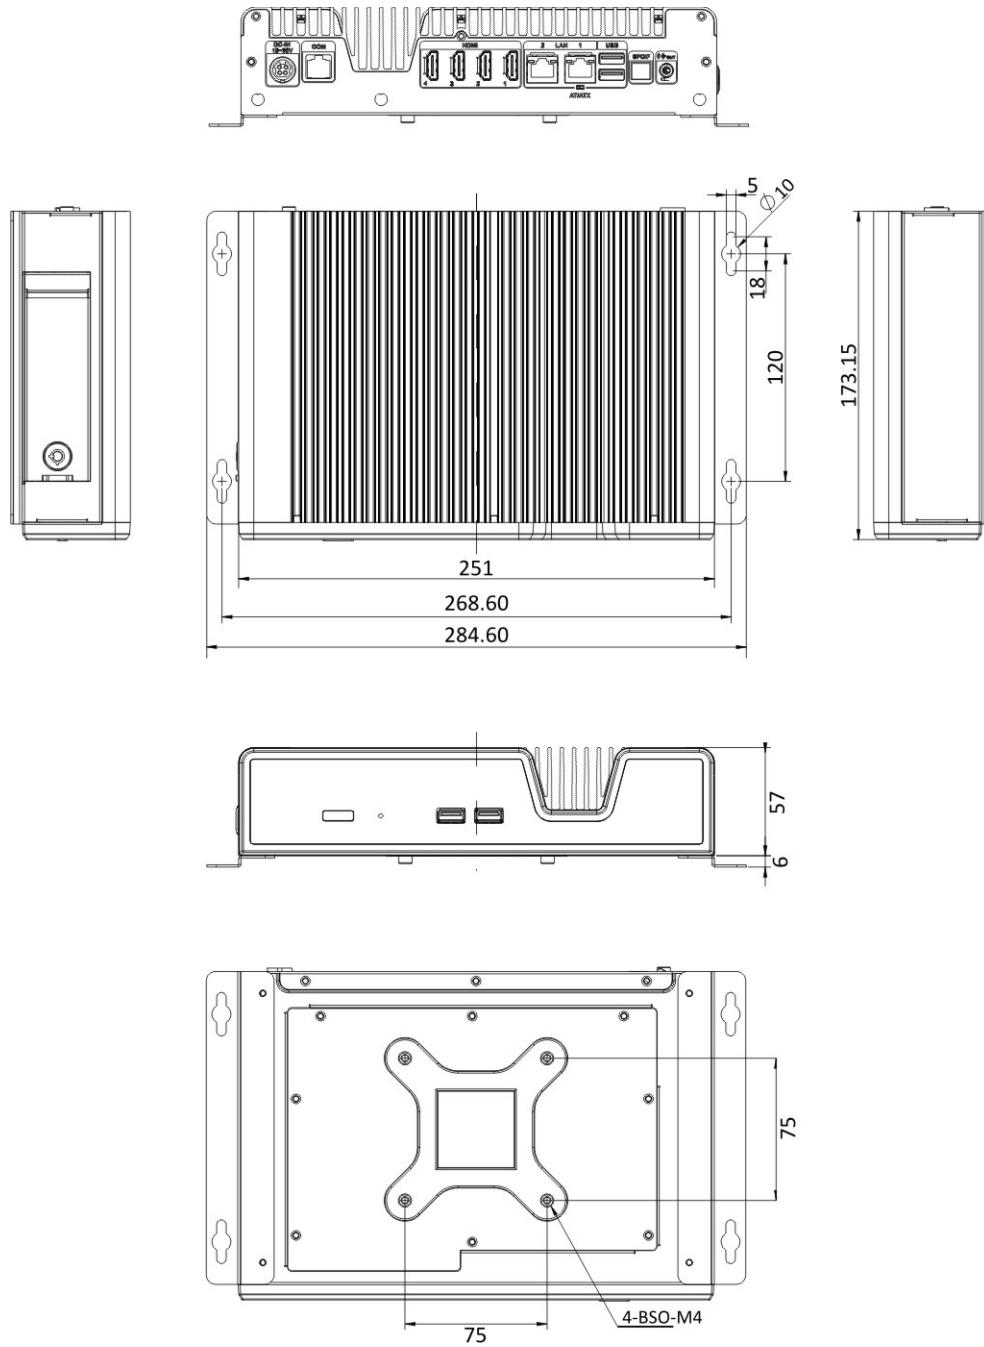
IDS-200-A70Mi Dimensions (mm)
